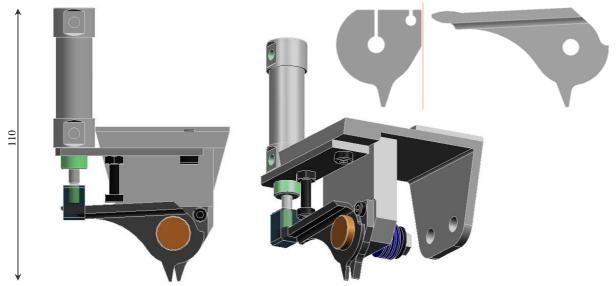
Wire cutter. Up right, closeup of EDM cutting path for scissor blades.
